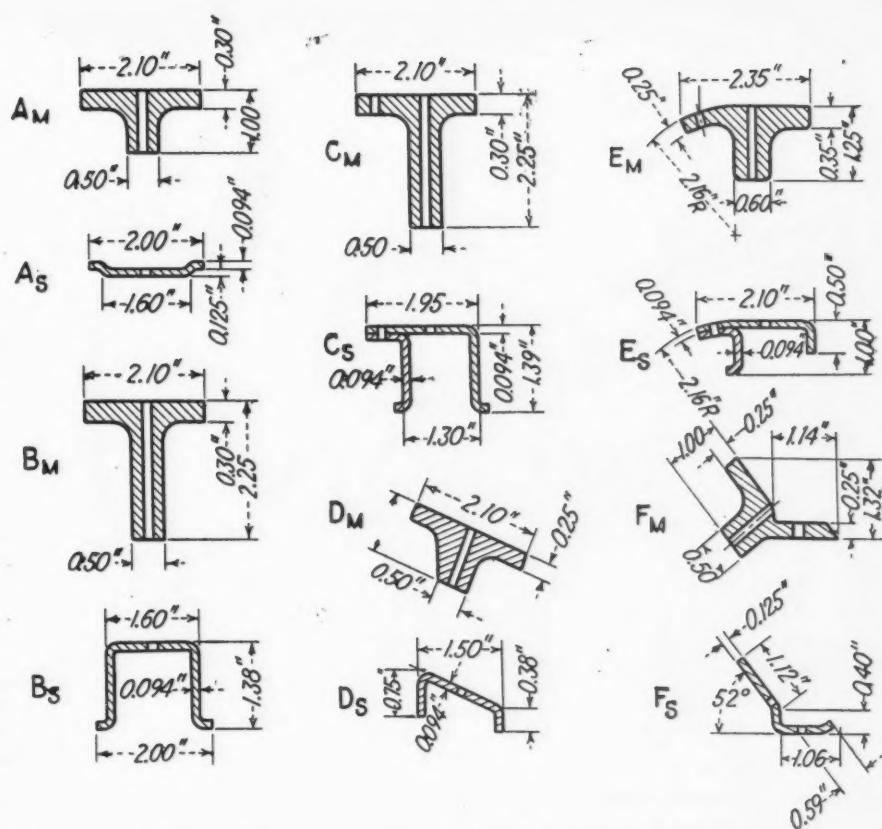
Cross-section comparison of welded steel and cast magnesium B-29 bomber nose frames.
